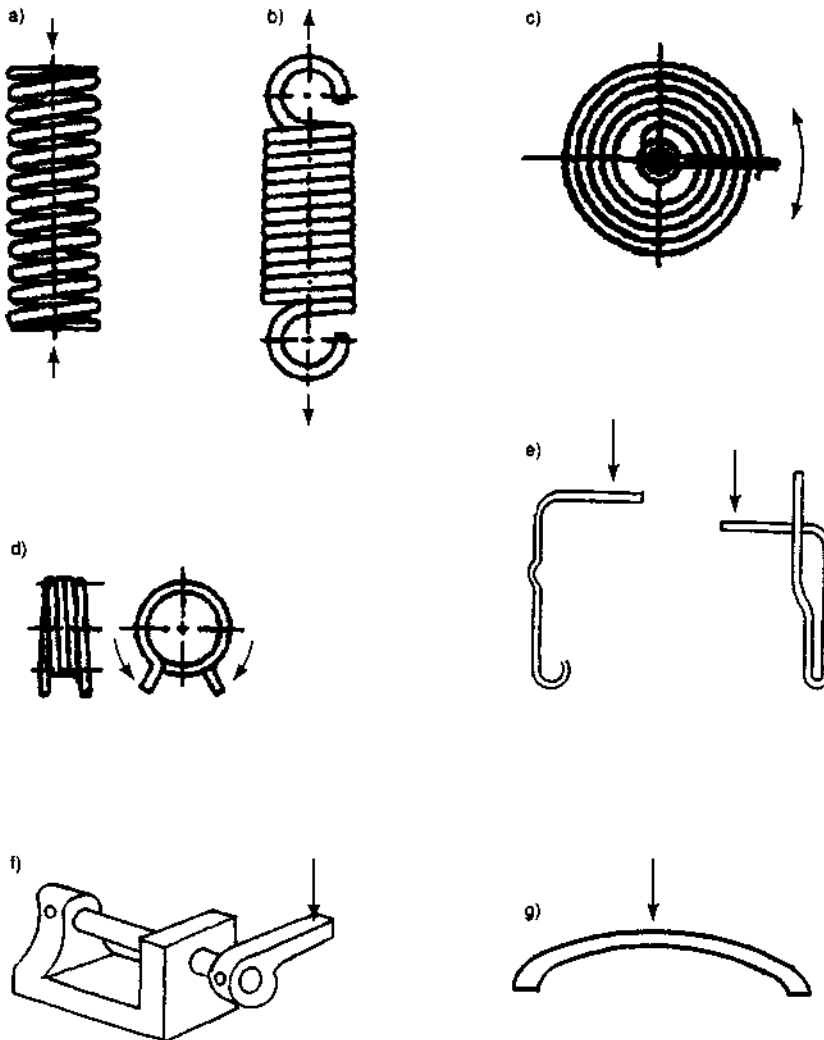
Different kinds of springs: a) helical compression spring, b) helical extension spring, c) hair-spring (for clocks and watches), d) helical torsion spring e) non-helical wire springs, f) torsion bar spring, g) flat spring.
